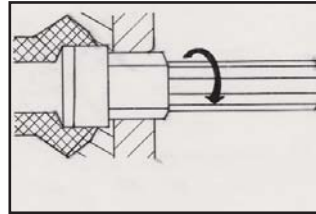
Open die forging of shafts consists of manipulating the sock and progressively forging the component to shape. Turning on a lathe brings the shaft to near net shape.
